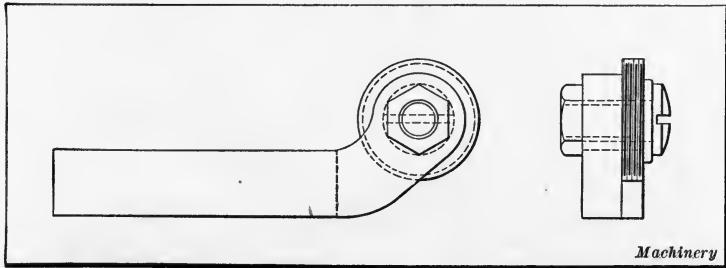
Thread Roll used on Acme Multiple-spindle Automatic
